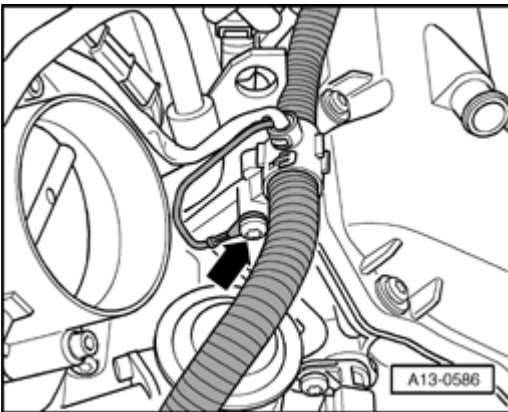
Removing Ground (GND) Cable On Right Cylinder Head
